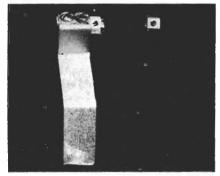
DETAILS OF HINGE used in fingertype end-effector assembly.
